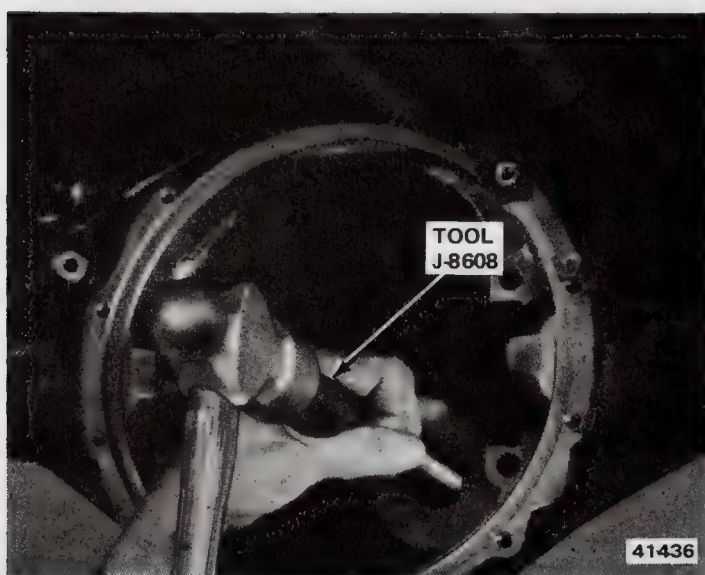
E-23 Pinion Rear Bearing Cup Installation
